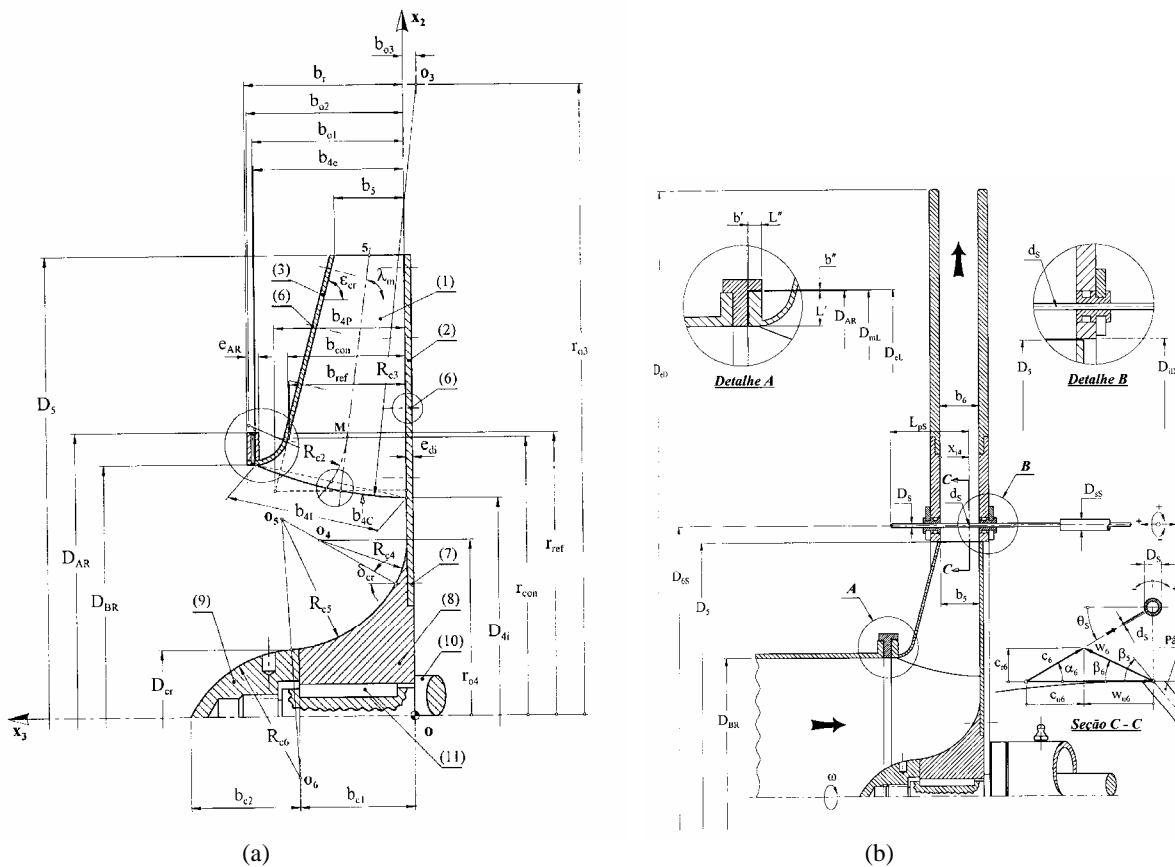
Scheme of the section of tests ring of the centrifugal impeller.
